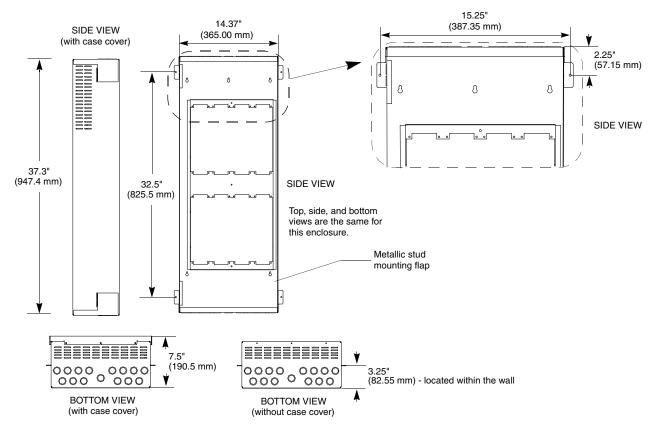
Top, bottom and front views of the RDA-ENC8W enclosure
